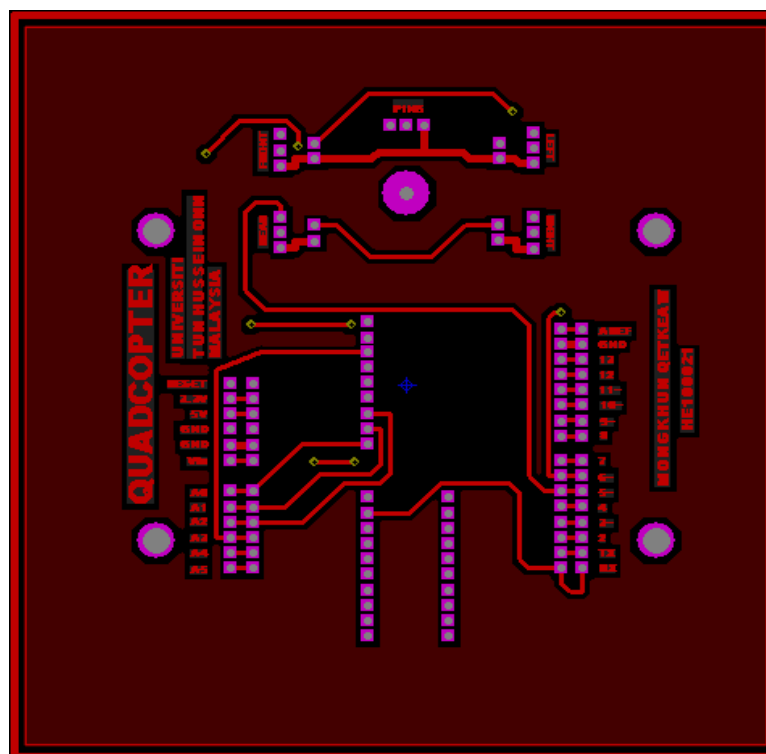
PCB layout of circuit board using Proteus ARES (Top side)
